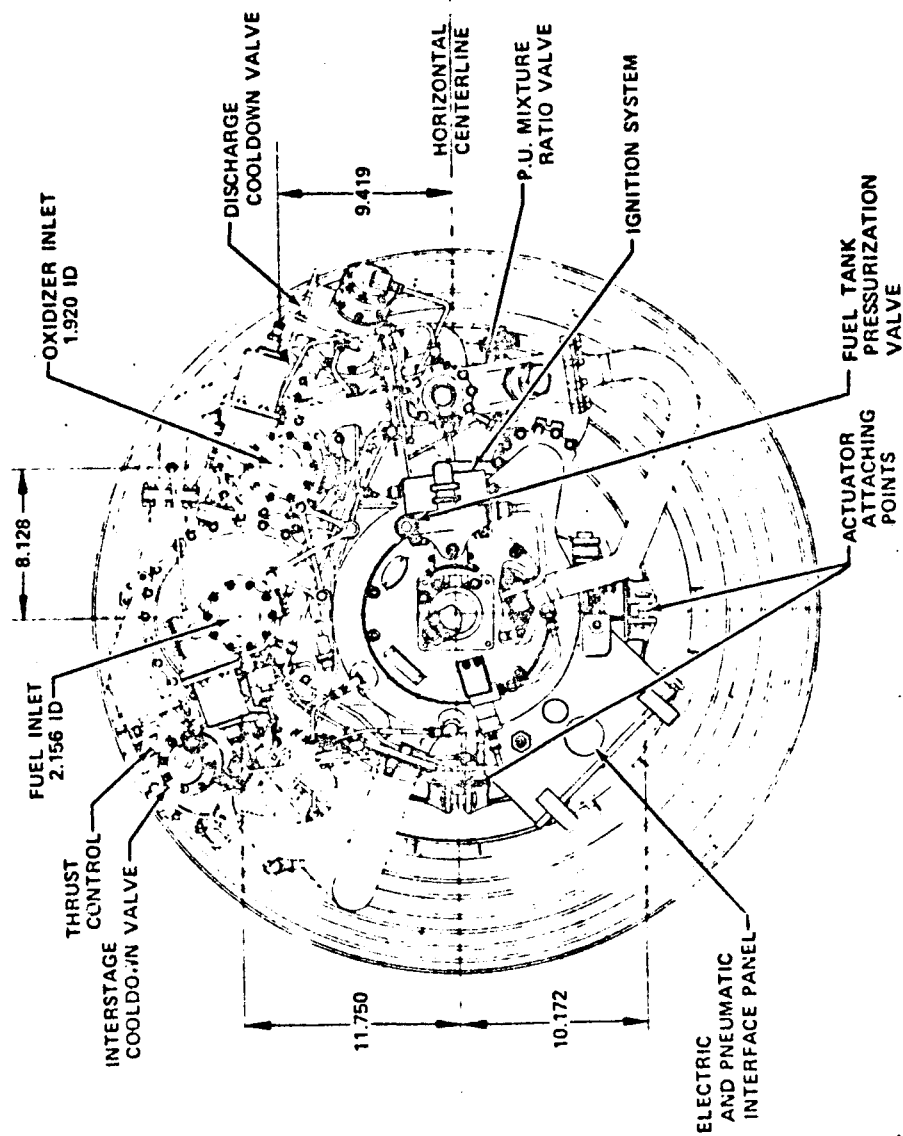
RL10 Category I Installation Drawing (Sheet 2)
